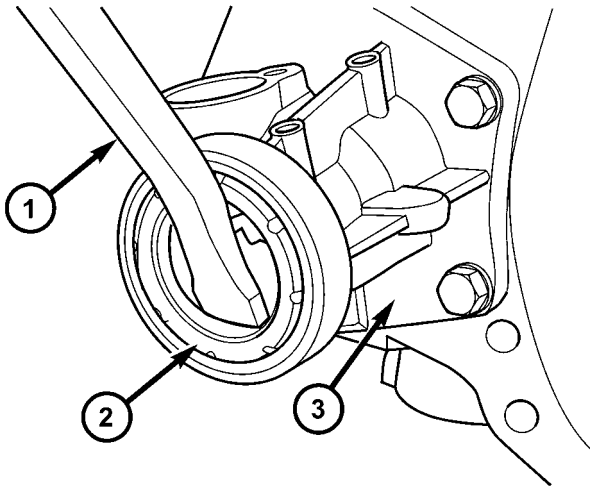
Axle Seal Removal (Extension Housing Side Shown)
